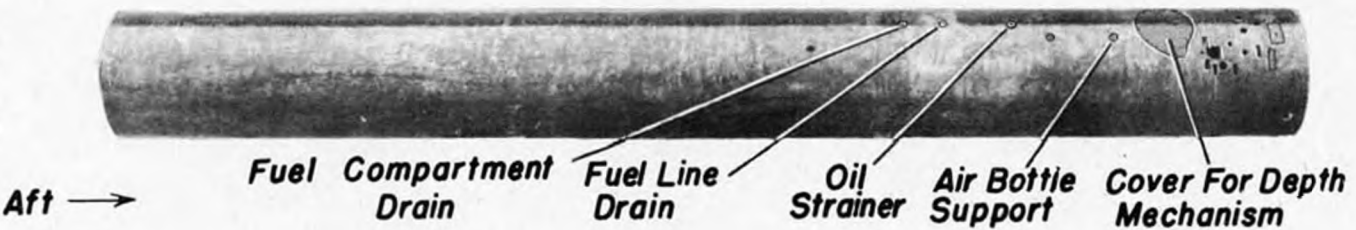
Torpedo Type 93 Model 1 Mod 2, Flask Section, Bottom View
